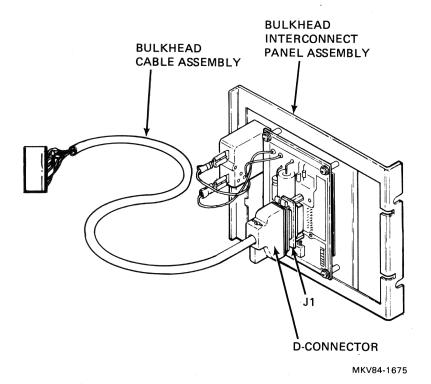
70-18798-xx Bulkhead Assembly and 70-18799-00 Bulkhead Interconnect Panel Assembly
